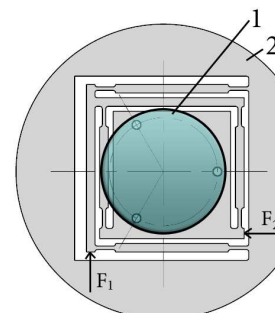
Flexure mount, 1 – mirror, 2 – flexure mount, where F_1 and F_2 are forces inducing motion
